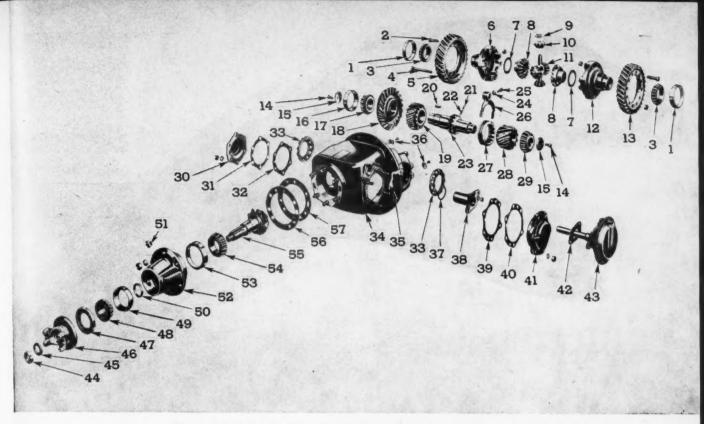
Exploded View of Two-Speed Differential Carrier Assembly
